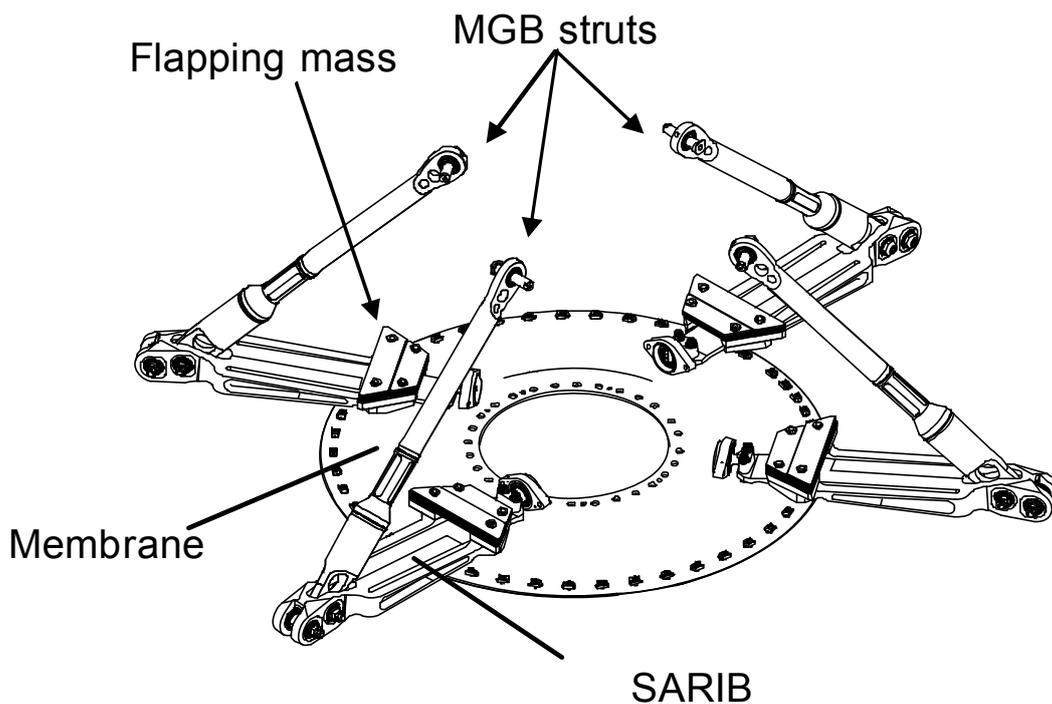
Example of flexible MR gearbox suspension - SARIB concept, NH-90 helicopter [7].
